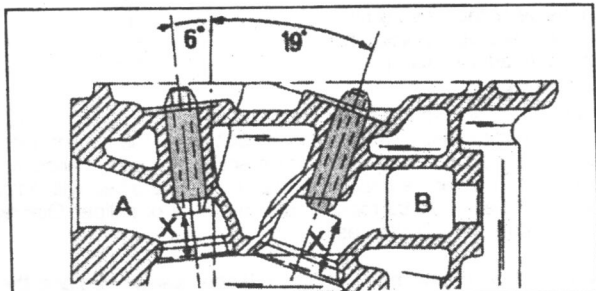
Sectional view of the cylinder head with the location of the exhaust valve guides (A) and the inlet valve guides (B). Dimension "X" shows the installation depth. Inlet valve guides = 31.5 mm, exhaust valve guides 21.3 mm.
